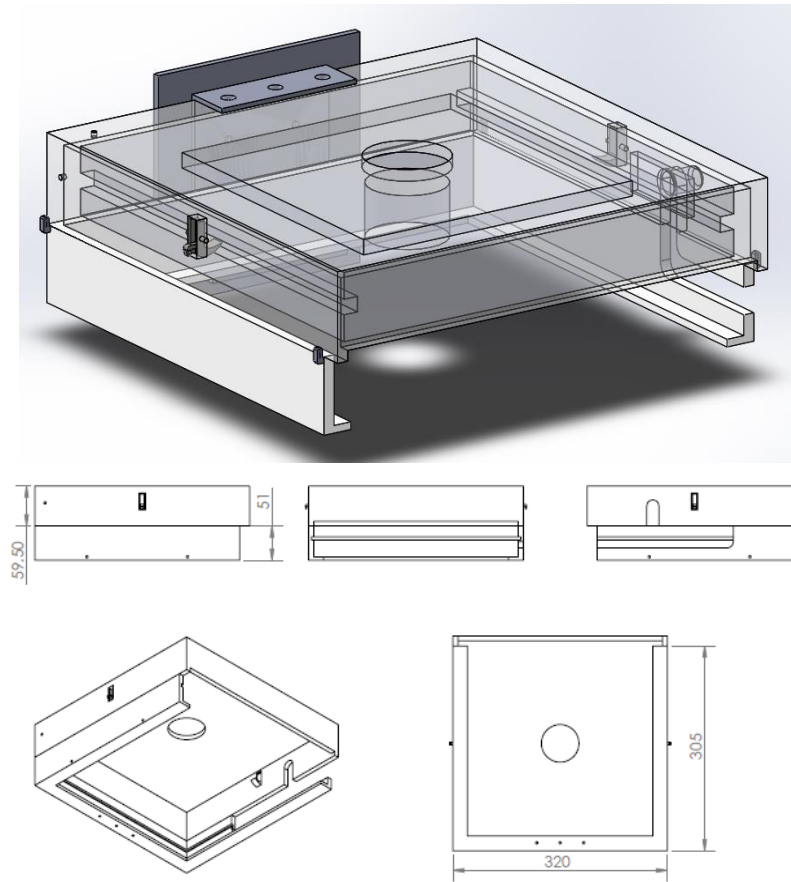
CAD rendering (top) and technical drawing (bottom) of the R3 intermediate portable imager redesign.
